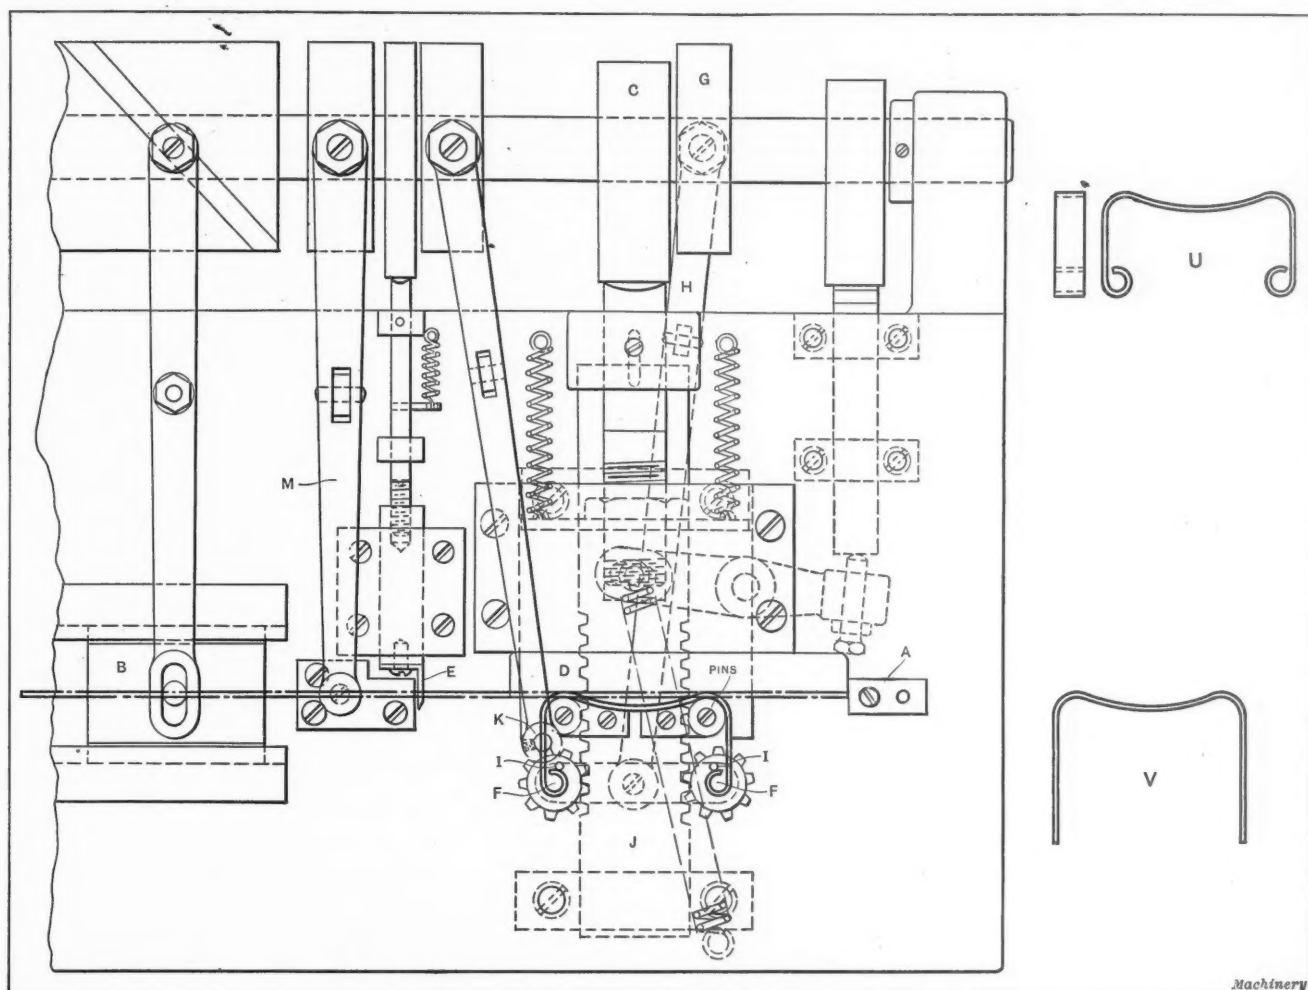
Automatic Machine Lay-out for forming Piece shown in Detail at U
